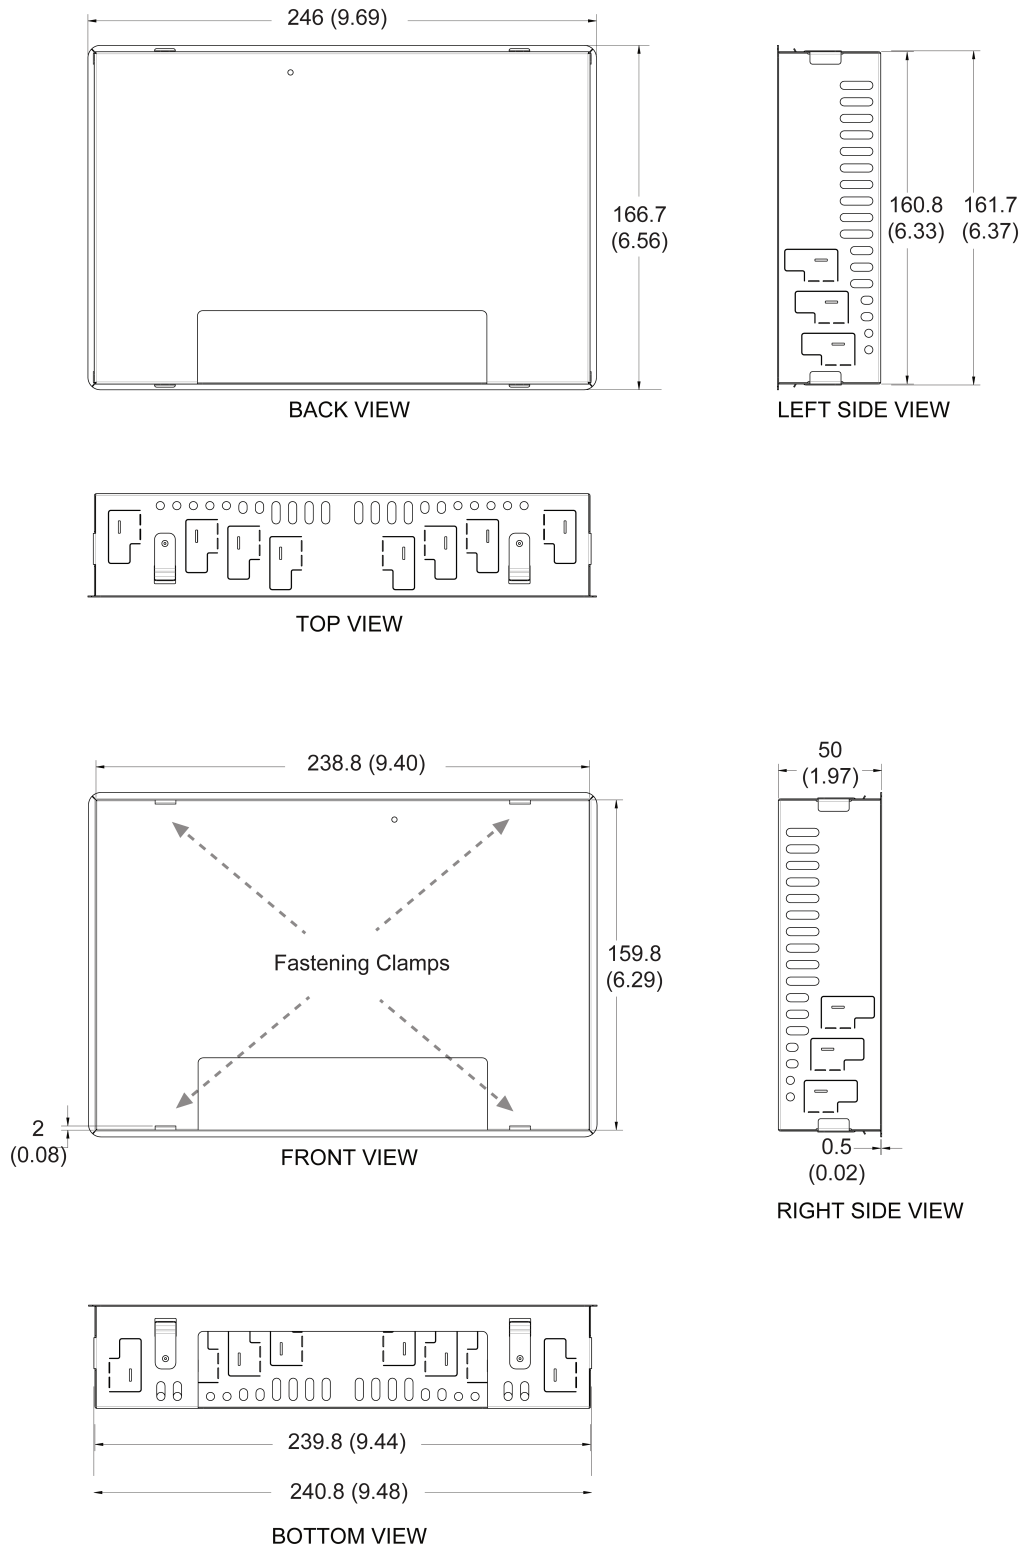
HORYZON-C10 Wall Mounting Kit dimensions
